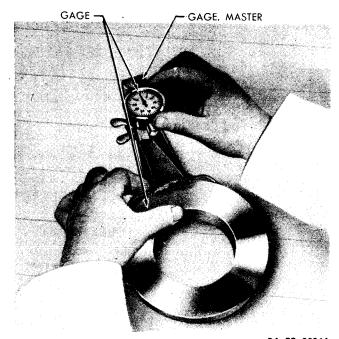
Indicator And Master Gage Drive Gear Setting Gage
